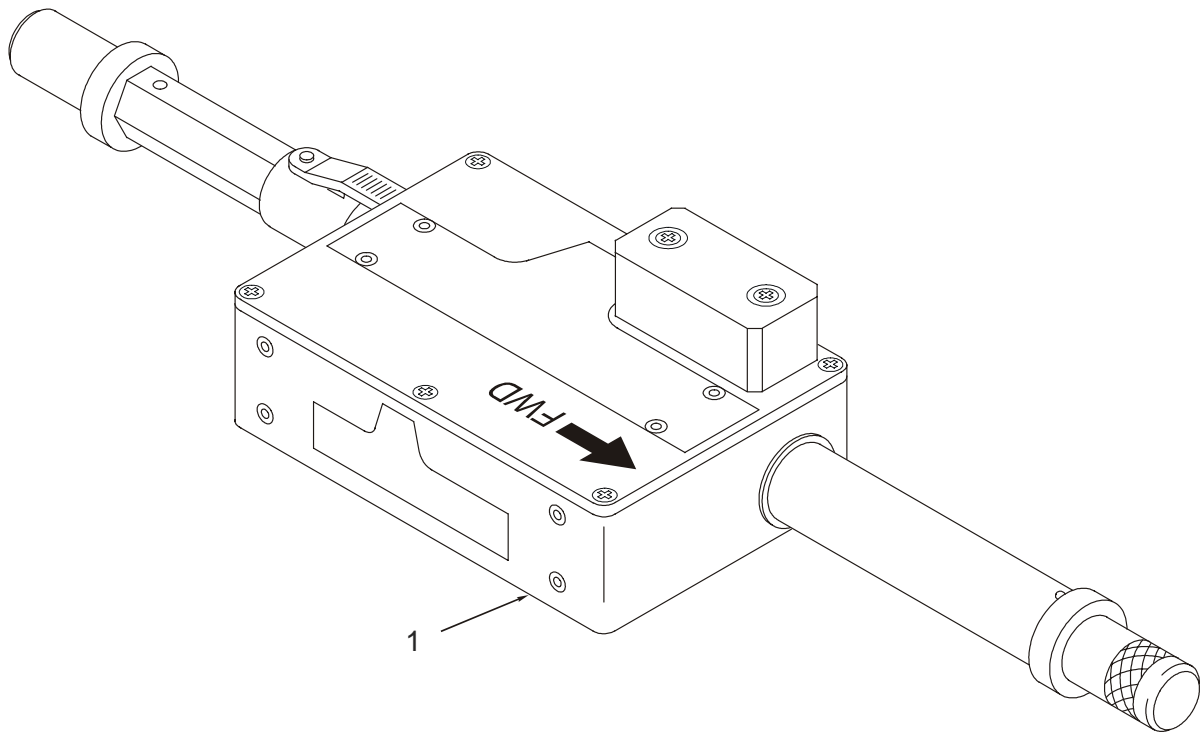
Mounting Box, Y-Connector (C-130; C-141; C-17)
